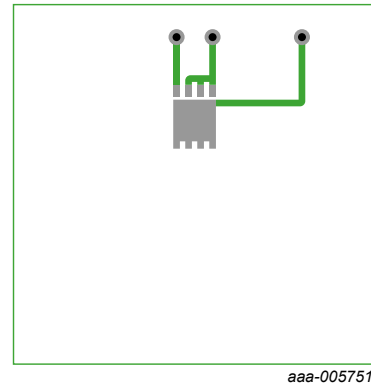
PCB layout for thermal resistance junction to ambient minimum footprint; FR4 Board; 2oz copper
